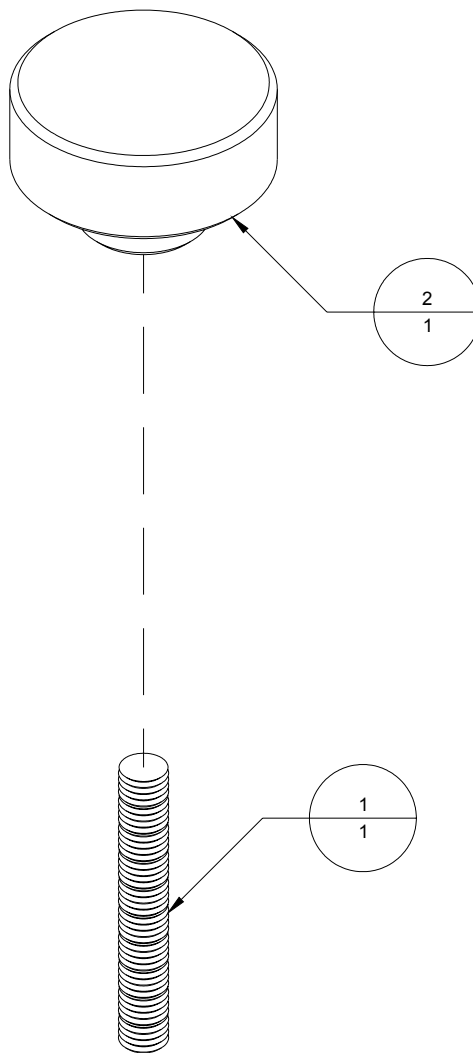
Knob Assembly, 10-32 UNF x 1 1/4" (438110A)
